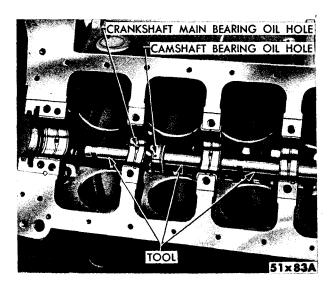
Installing Camshaft Bearing Shells—Tool C-3034
